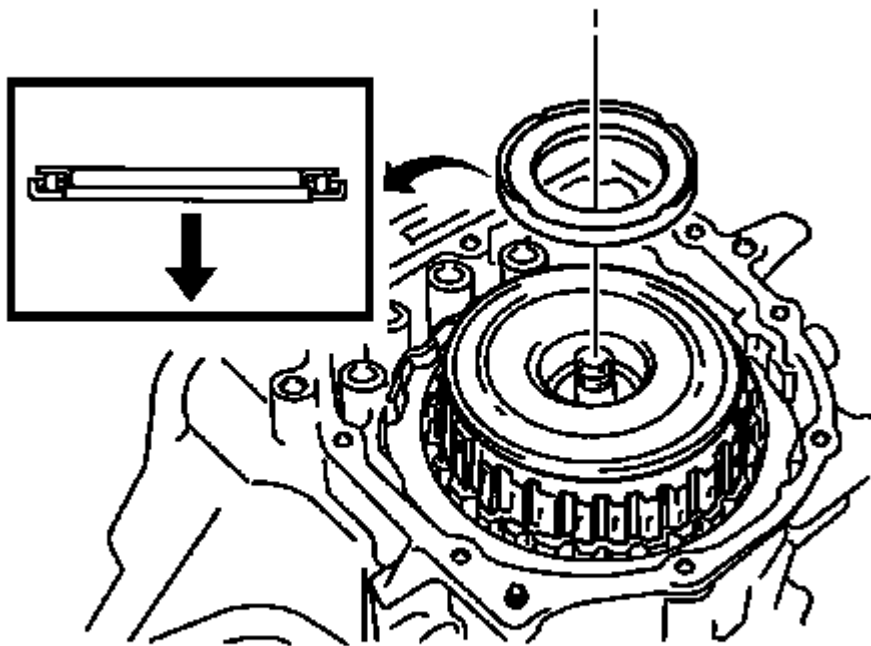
Thrust Needle Roller Bearing & Forward/Reverse Clutch Assembly
